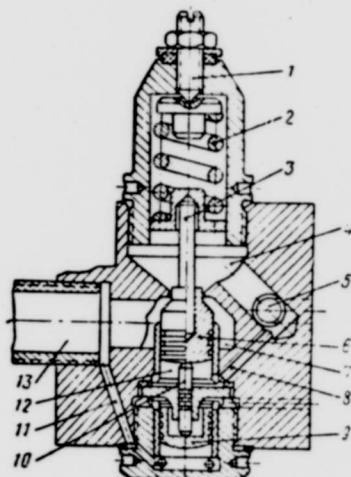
Direct action reduction valve with a piston sensing device: 1 - regulating screw; 2 - spring; 3 - valve rod; 4 - inlet cavity; 5 - inlet duct; 6 - piston-valve; 7 - outlet cavity; 8 - duct; 9 - sensing device piston; 10 - rod; 11 - duct; 12 - unloading cavity; 13 - outlet duct.
